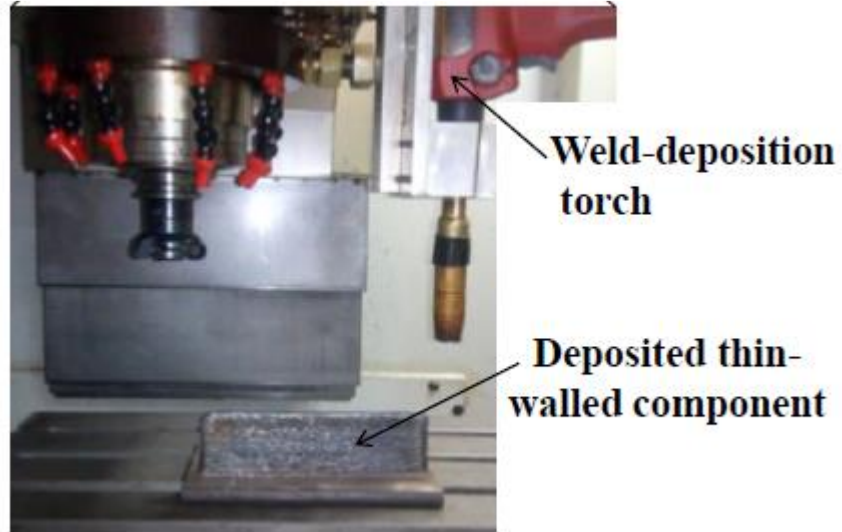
Manufacturing of the product by weld layer deposition
